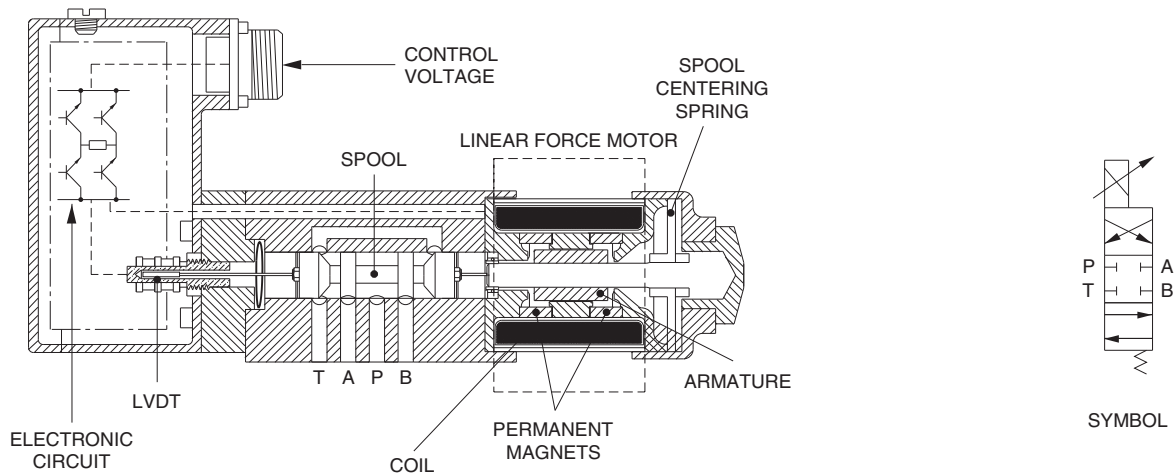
Proportional valve using a linear force motor for actuation of its spool.
